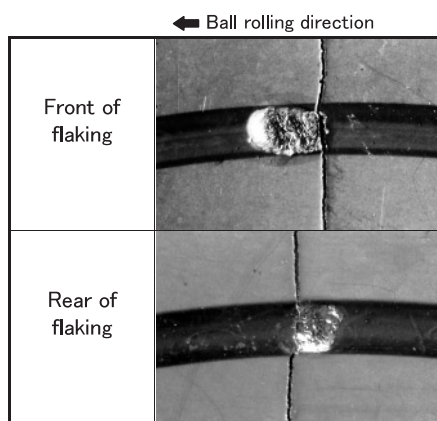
Examples of fractured position after static breaking (Specimen:H)
